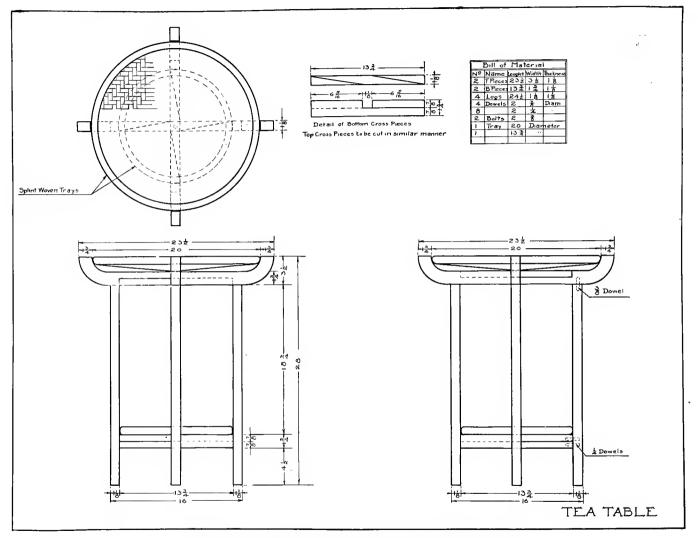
Working Drawing of Tea Table (Eighth Grade)
